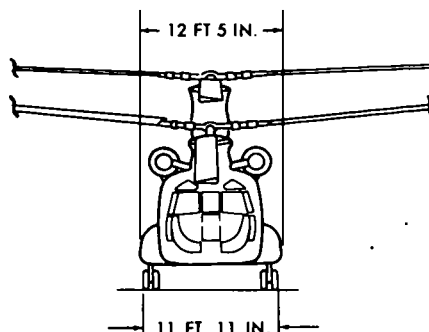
Principal Dimensions, CH-47A (Chinook)
